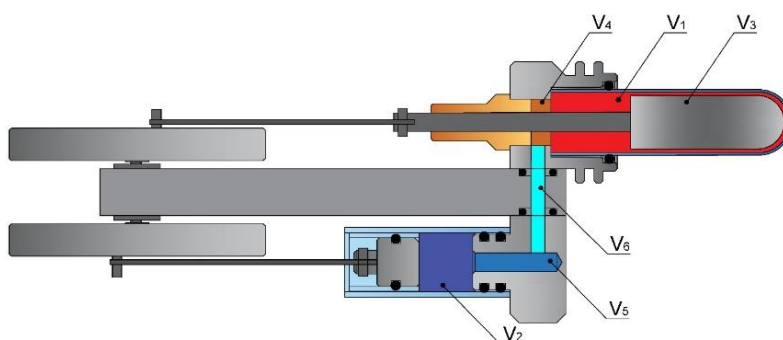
Arrangement of the basic part of the manufactured γ -modification Stirling engine
